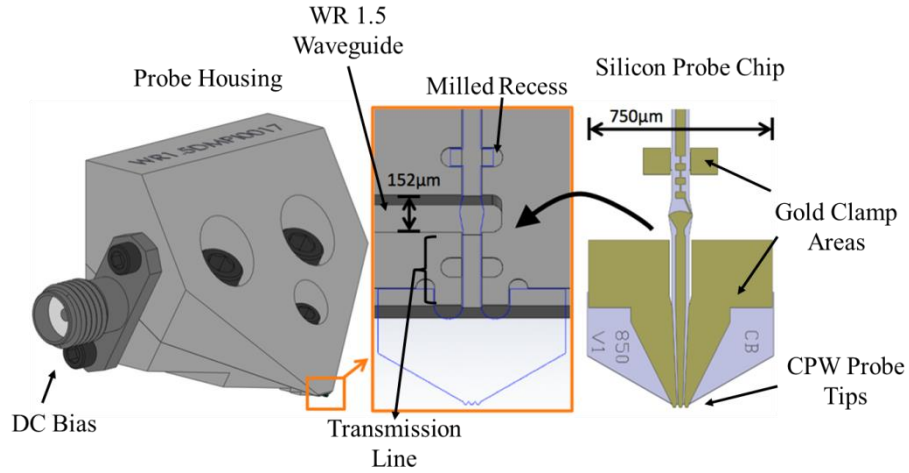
Dominion Microprobes WR1.5 (500-750 GHz) on-wafer probe assembly.
